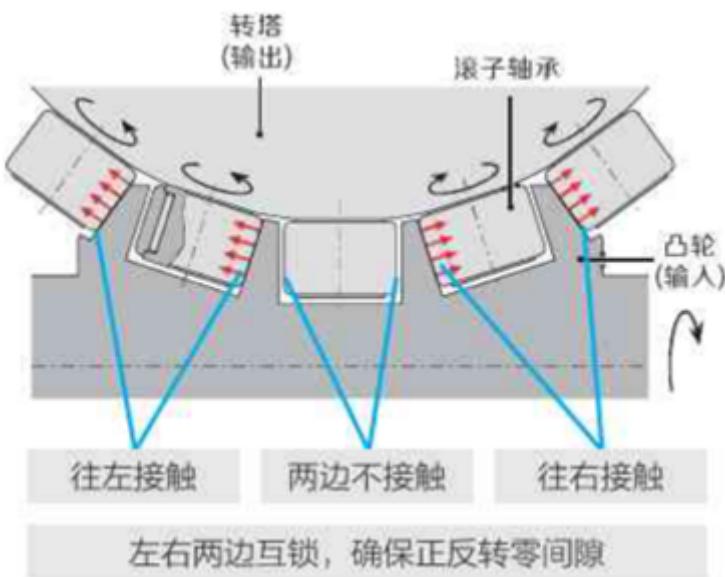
Team's design arrangement of Roller Cam drive
